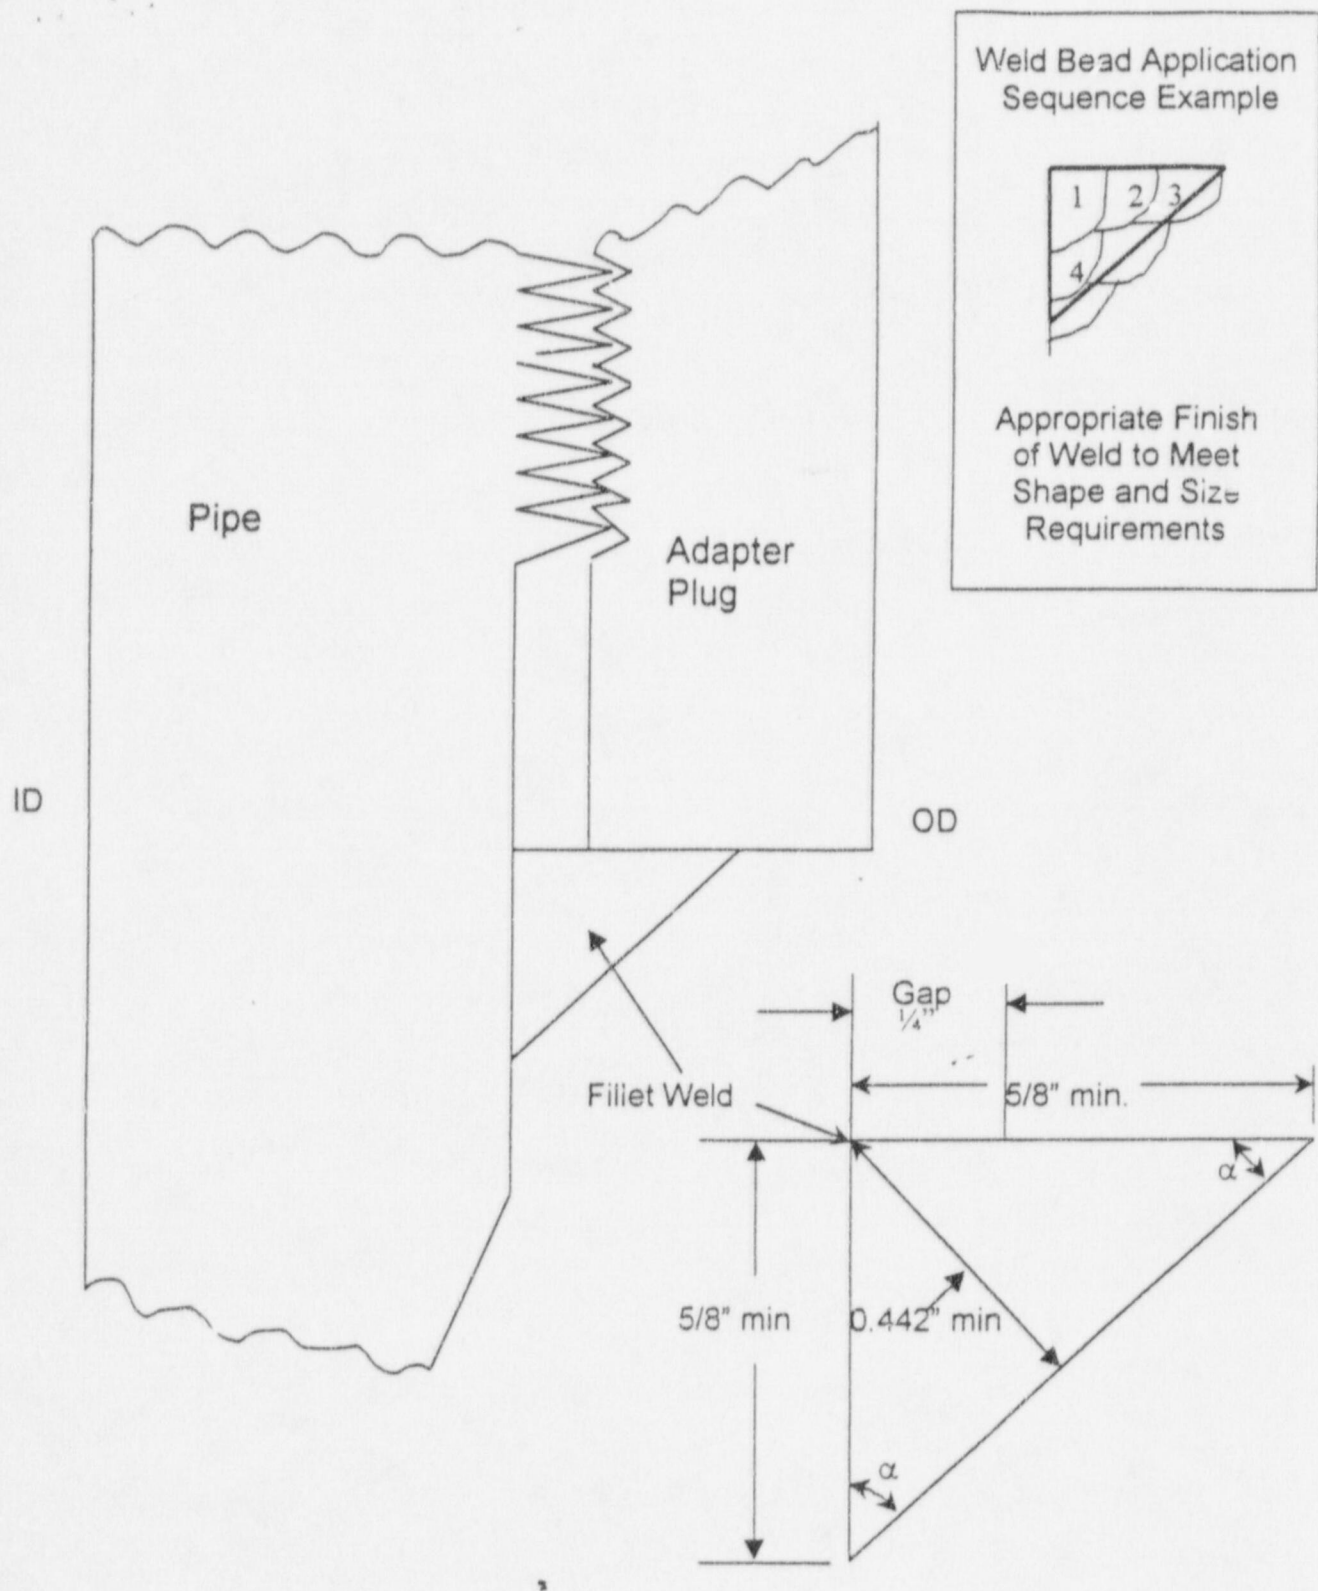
Fillet Weld Design for Point Beach Unit 1 CRDM Adapter Plug Repair
